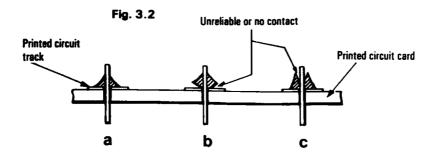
(b) and (c) show exaggerated profiles of unsuccessful joints. These can be caused by inadequate heating of one part, or the other, of the joint, due to the iron being too cool, or not having been in direct contact with both parts; or to the process being performed too quickly. An alternative cause might be contamination of the unsoldered surface.
